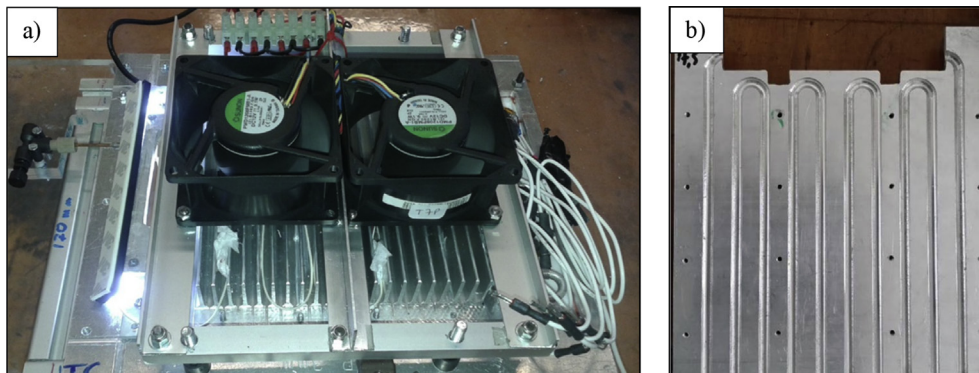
a) Air fan system mounted above the heat sink; b) Milled heat sink.
